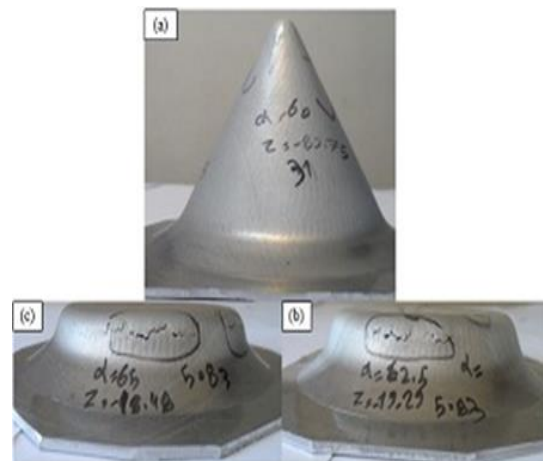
Incremental forming of 5083 base sheet (a) 60°, (b) 62.5°, (c) 65°
